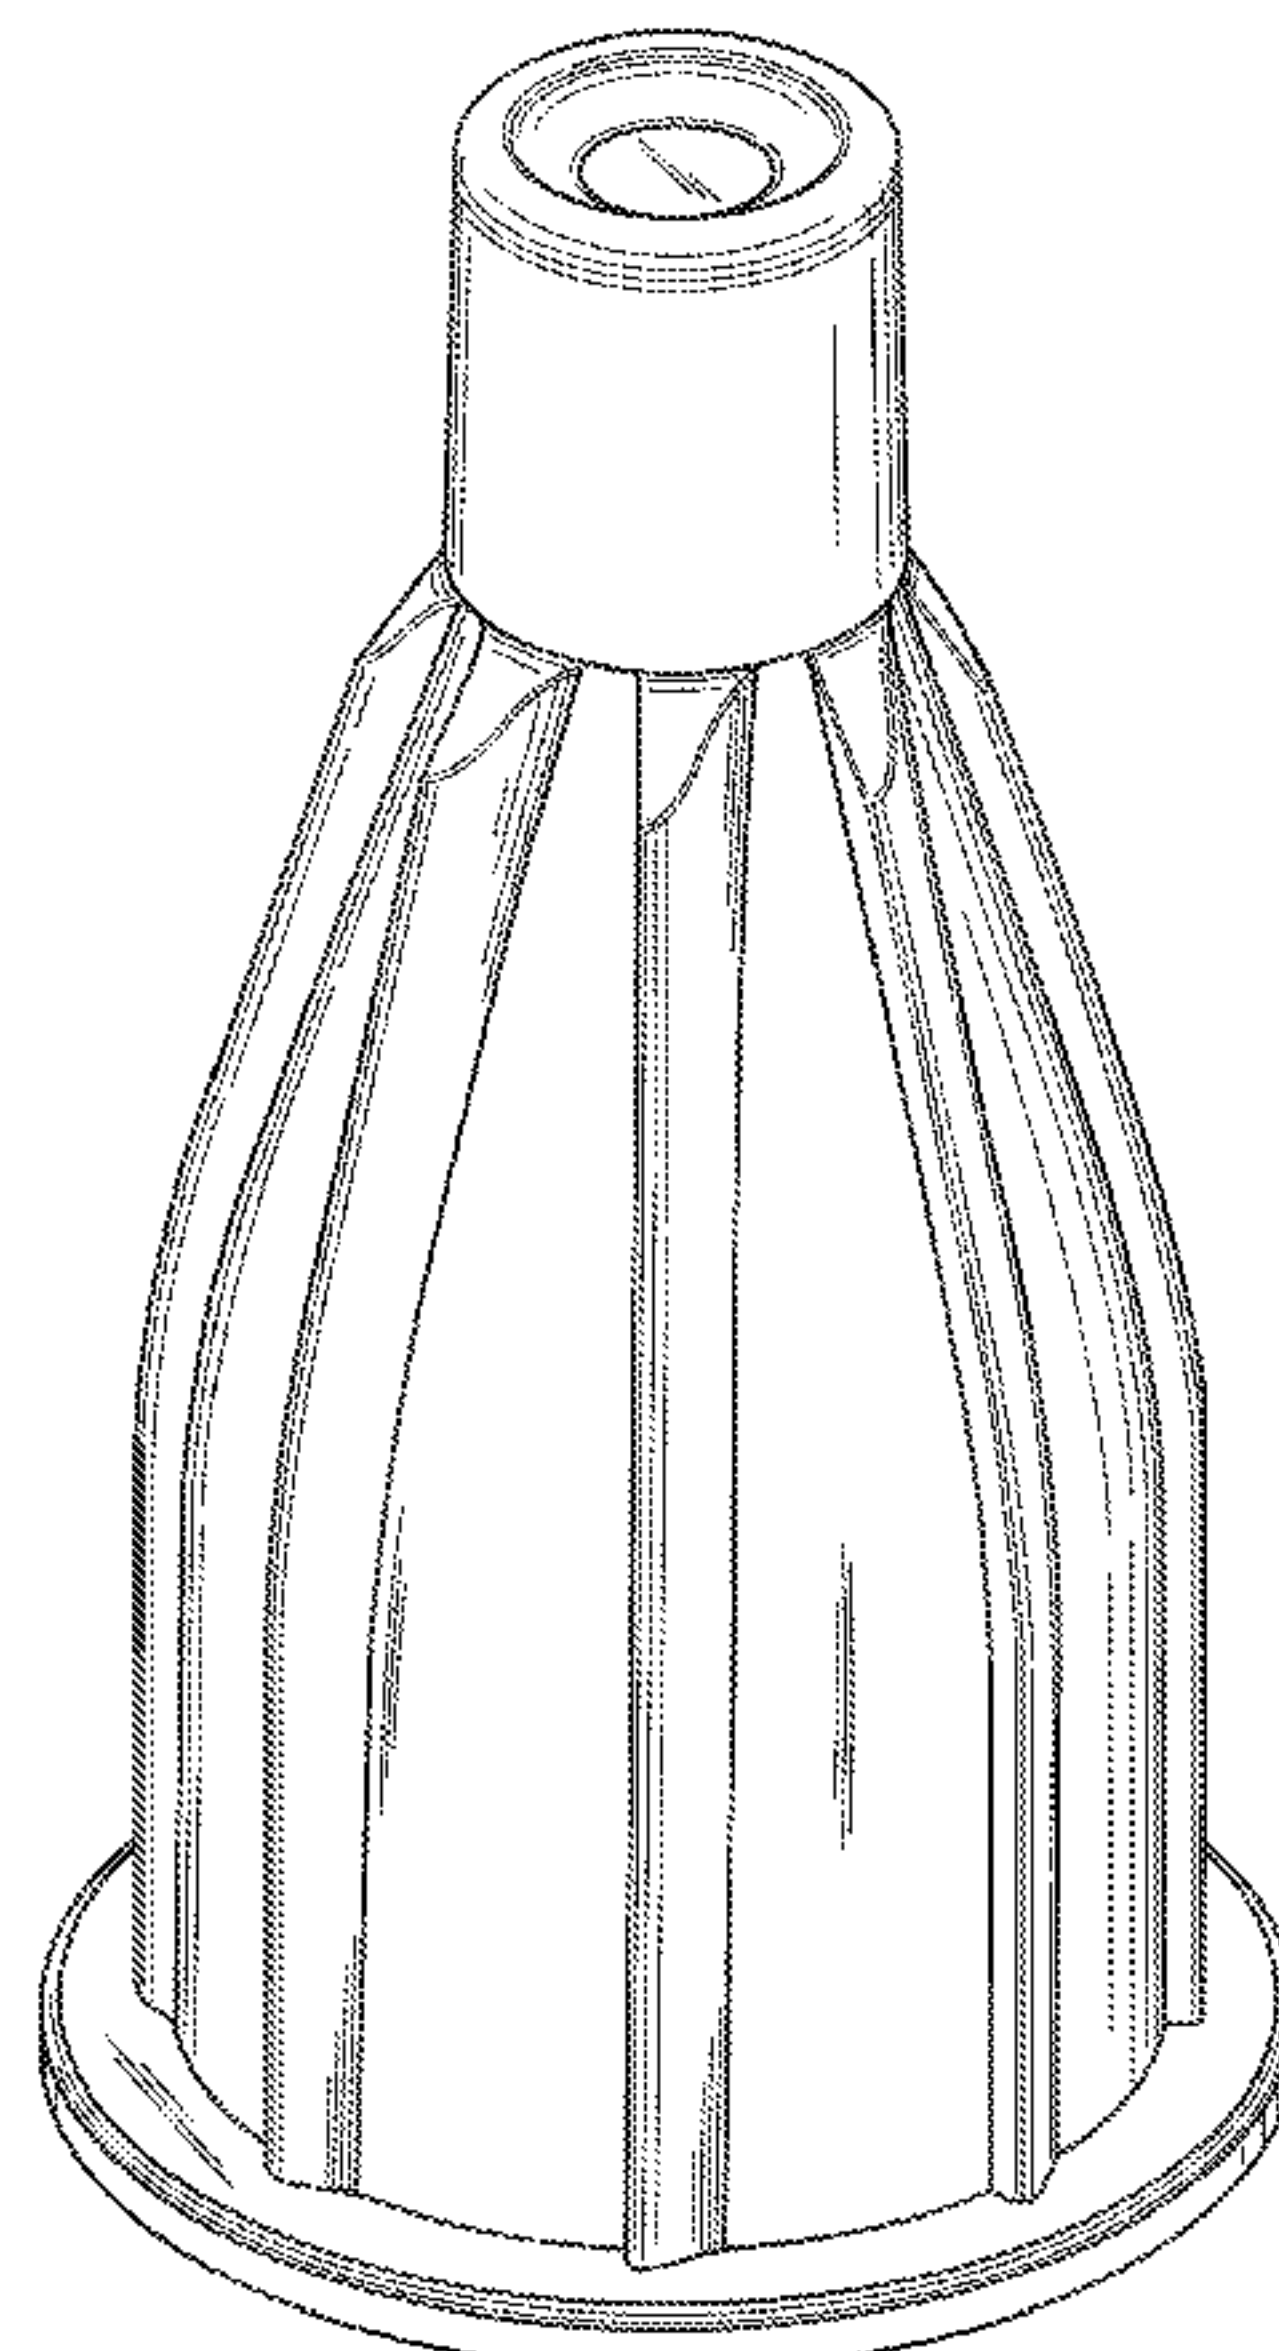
is a top and side perspective view of a torque limiting needle cap showing our design;
